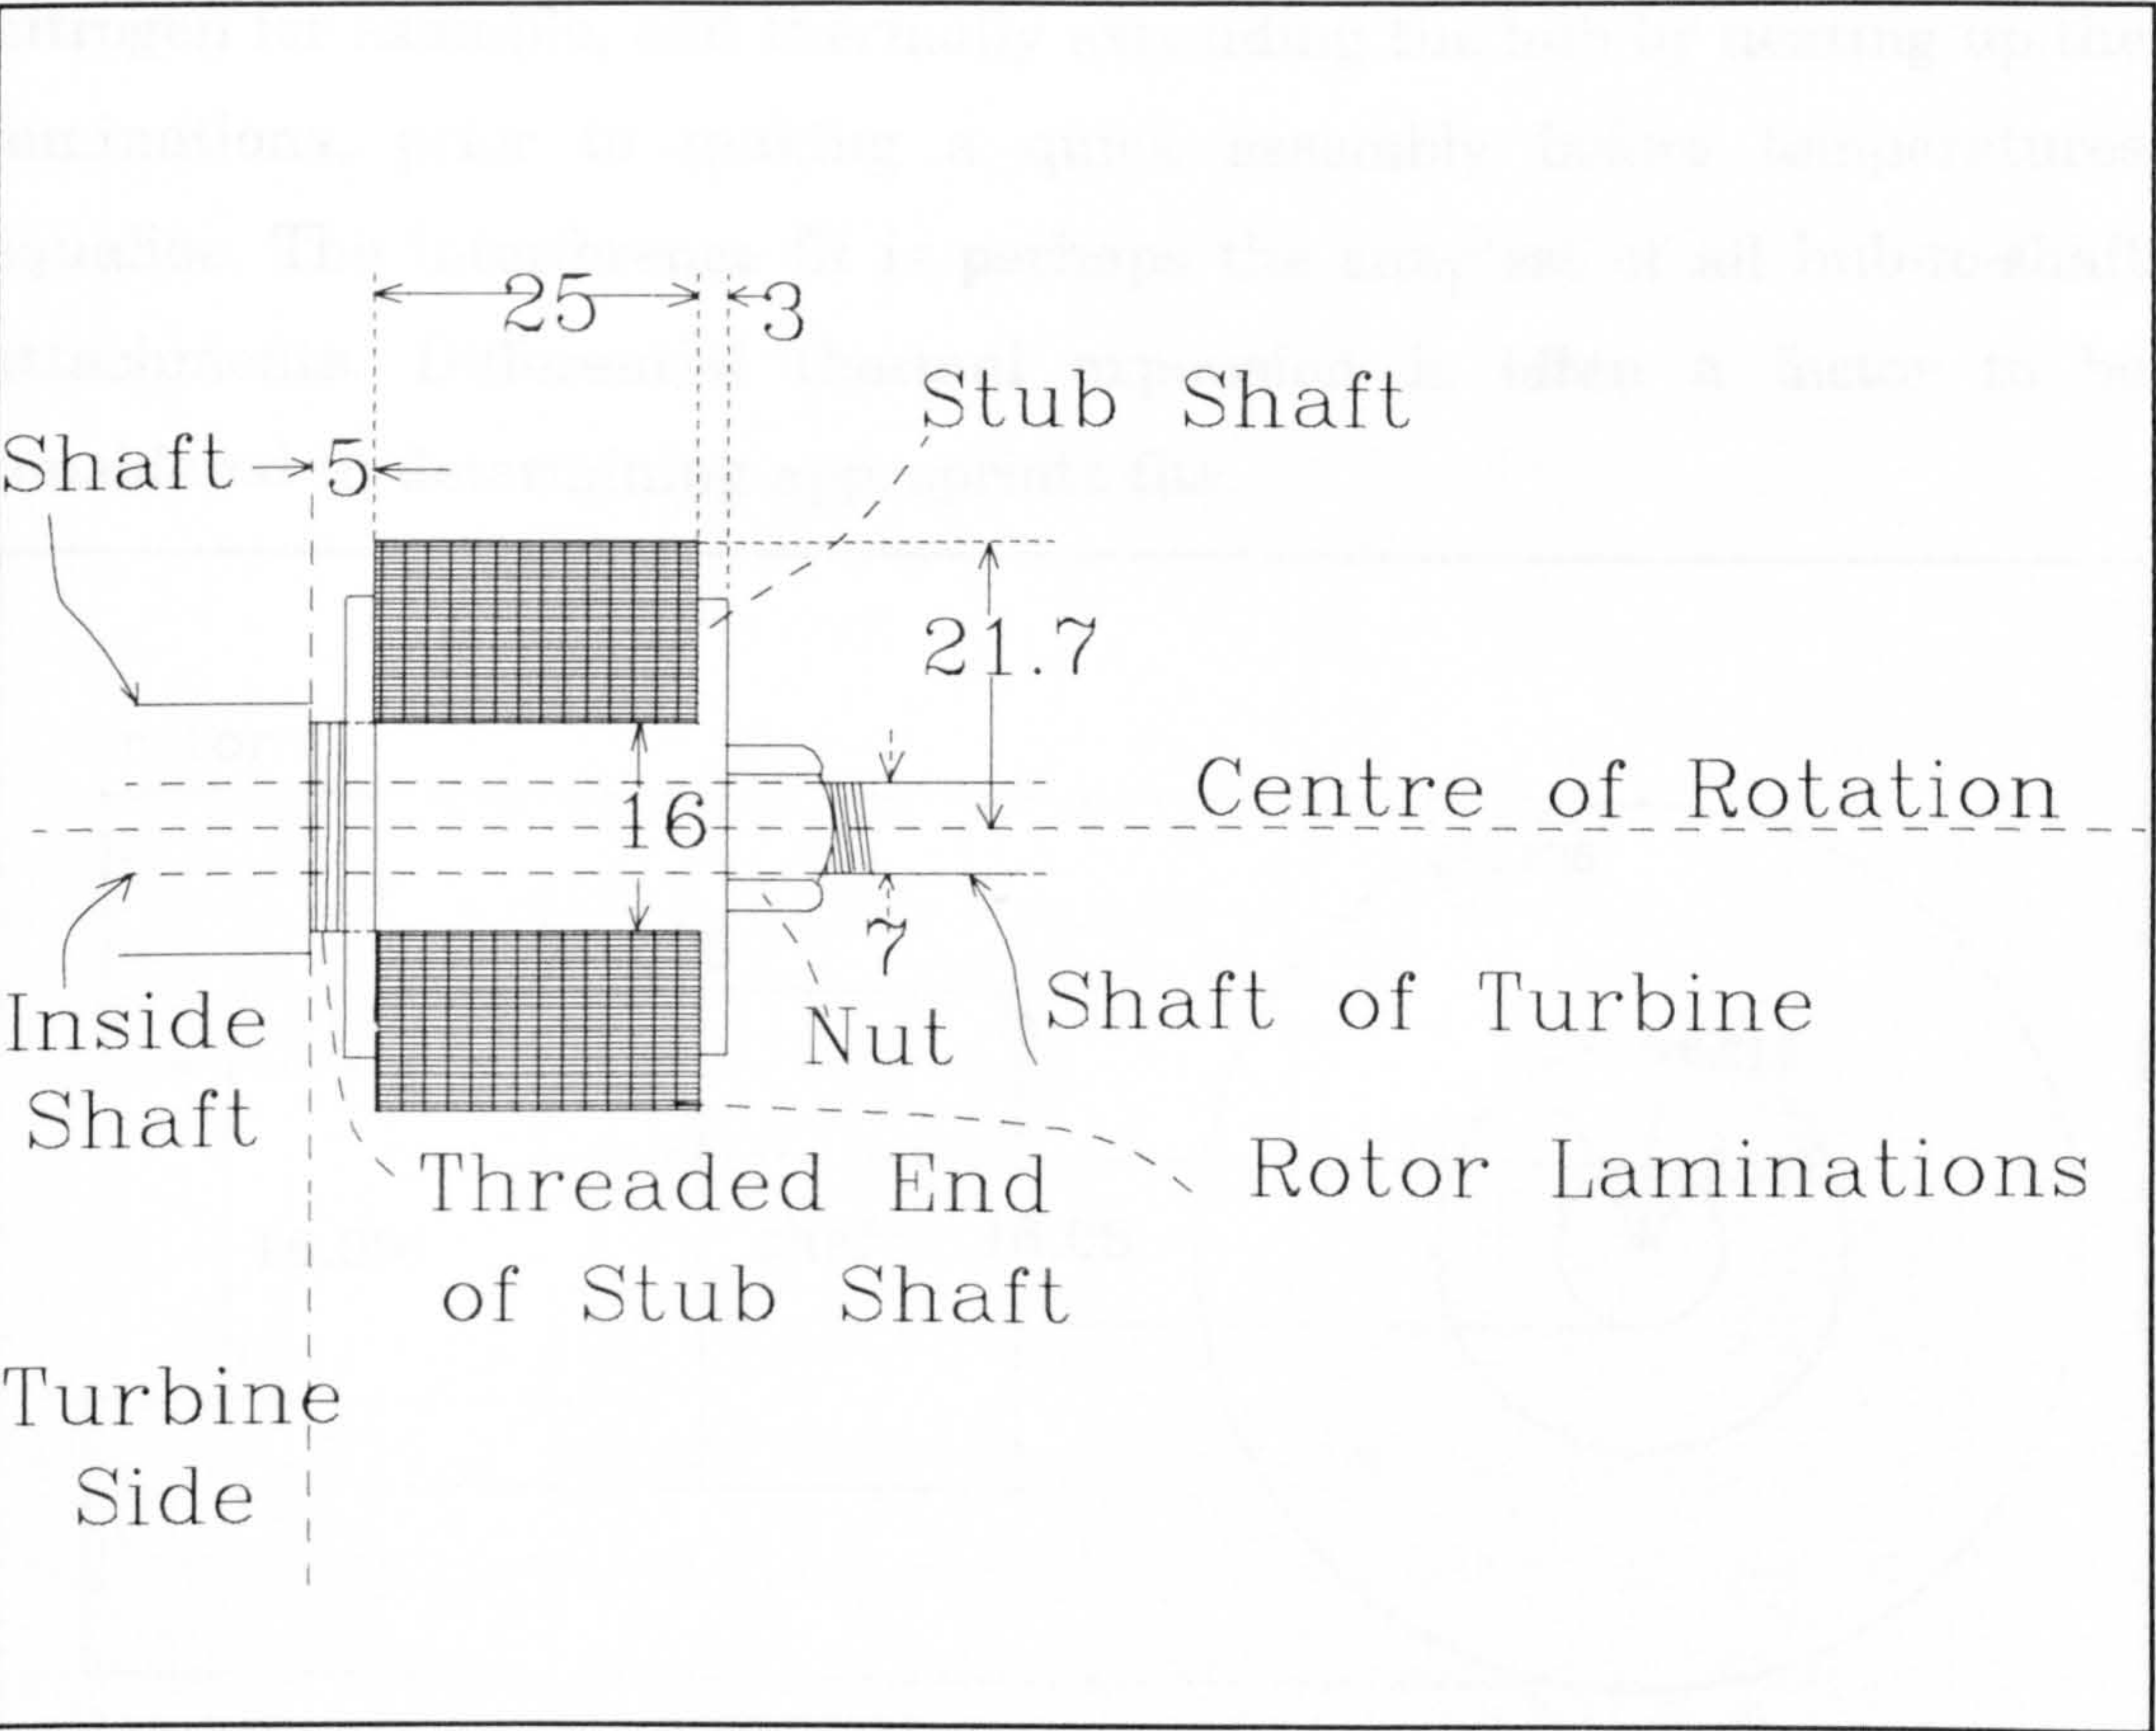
Rotor laminations and stub shaft assembly to turbine.
